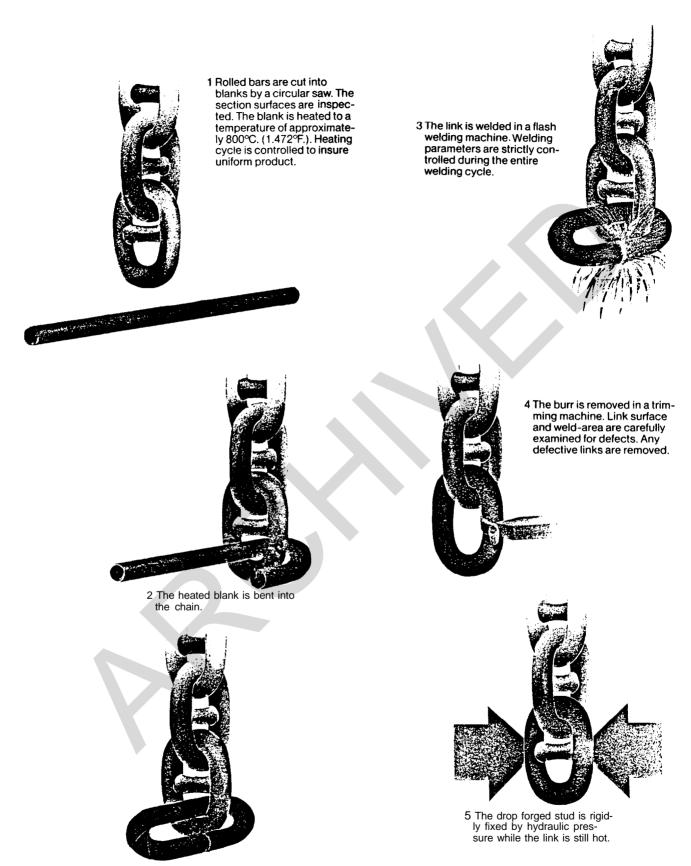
Producing Flash Butt-Welded Chain
